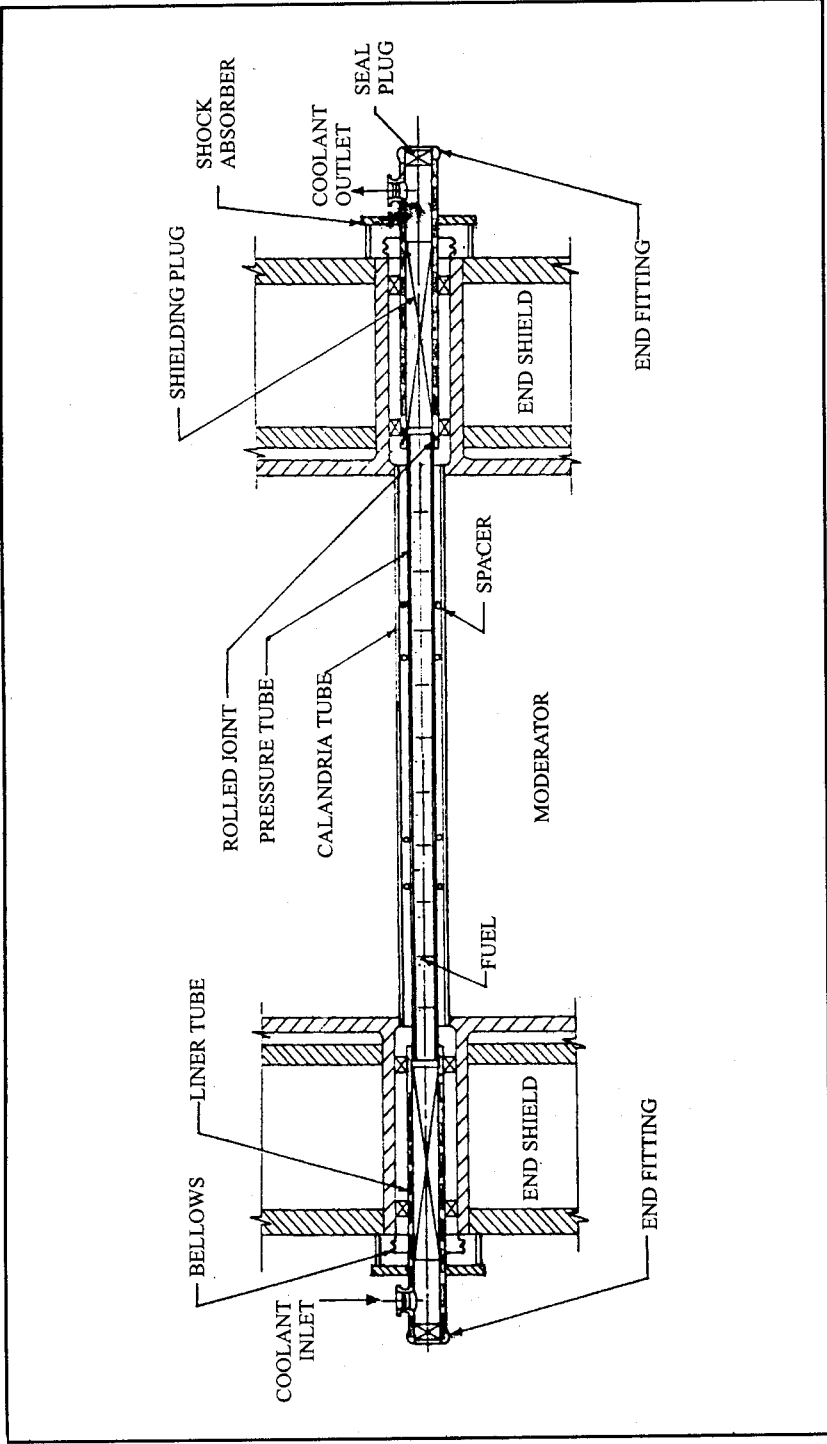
TYPICAL COOLANT CHANNEL ASSEMBLY
